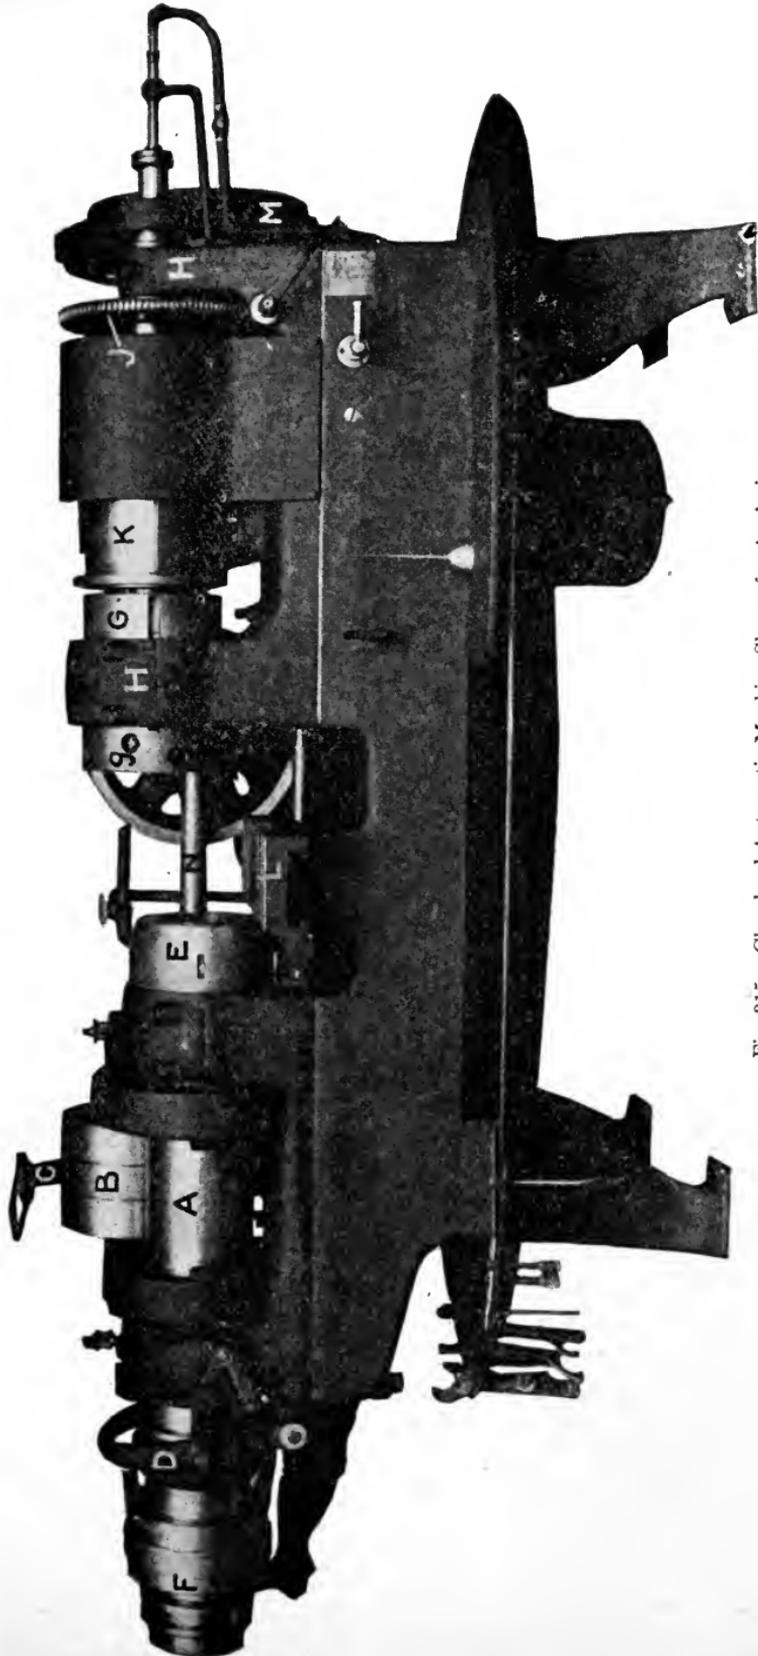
Cleveland Automatic Machine Shown for Analysis
